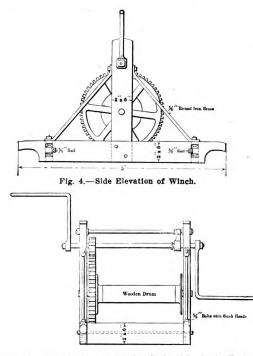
End Elevation of Winch.-Scale, 1/2 In. to the Foot.
